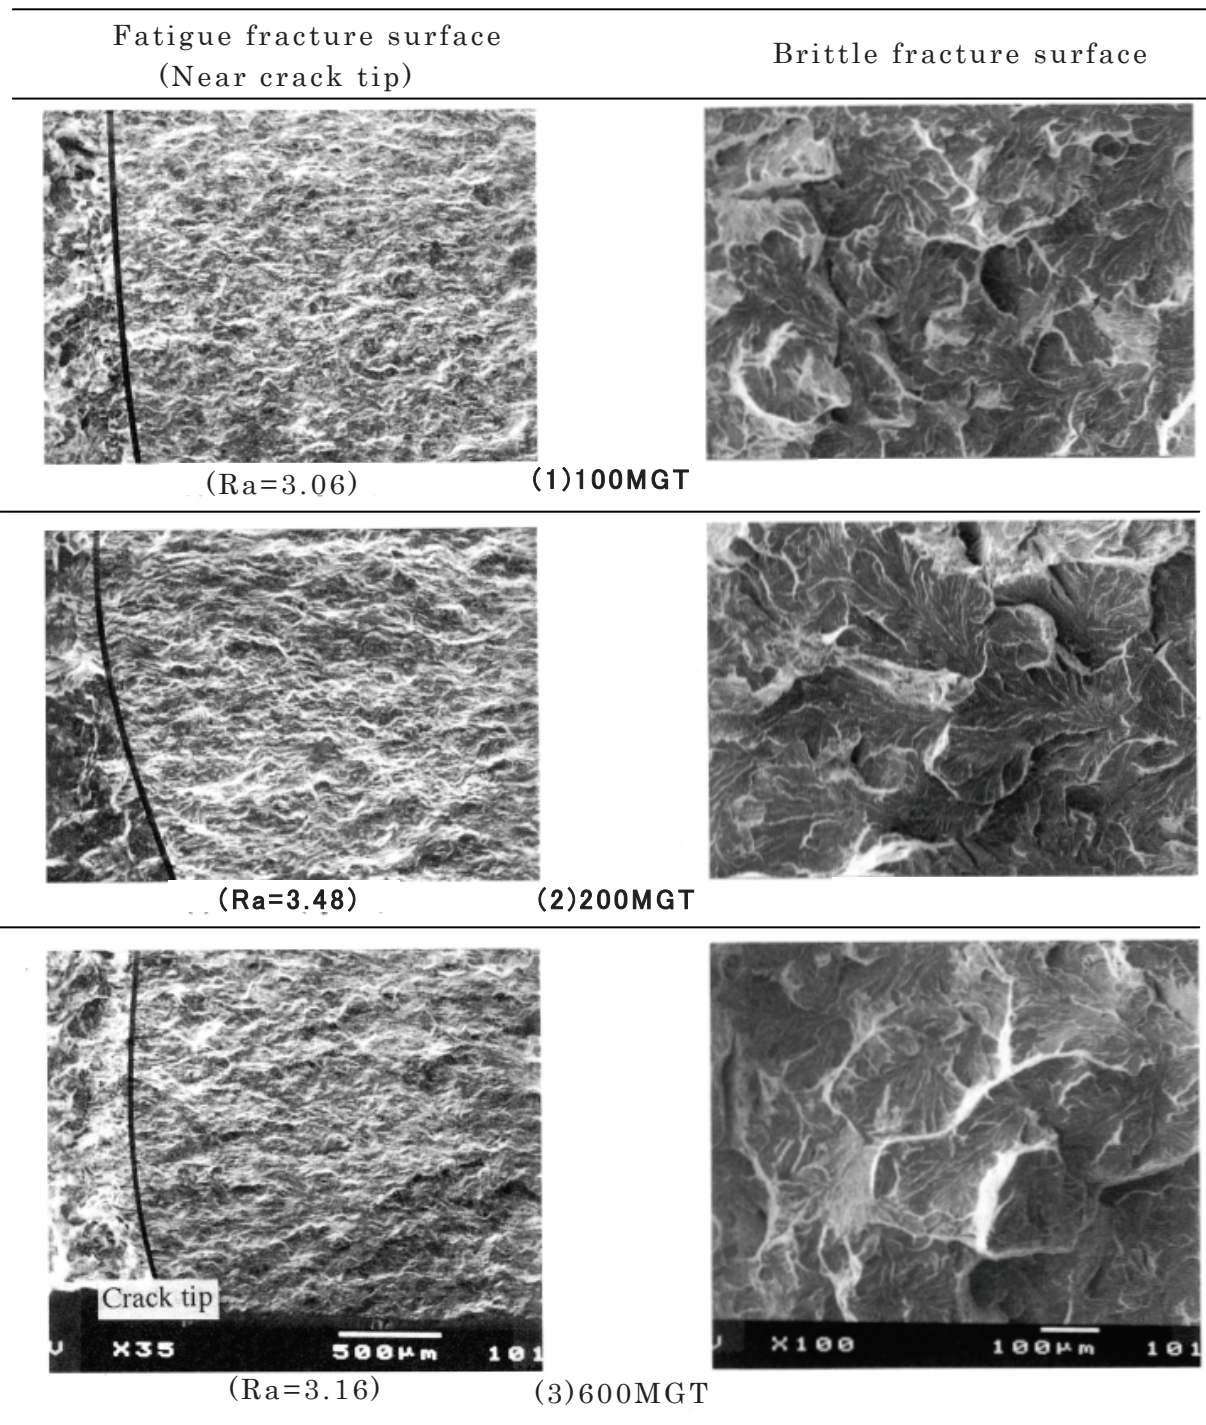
Comparison of fatigue surface and brittle fracture surface of each test piece.
